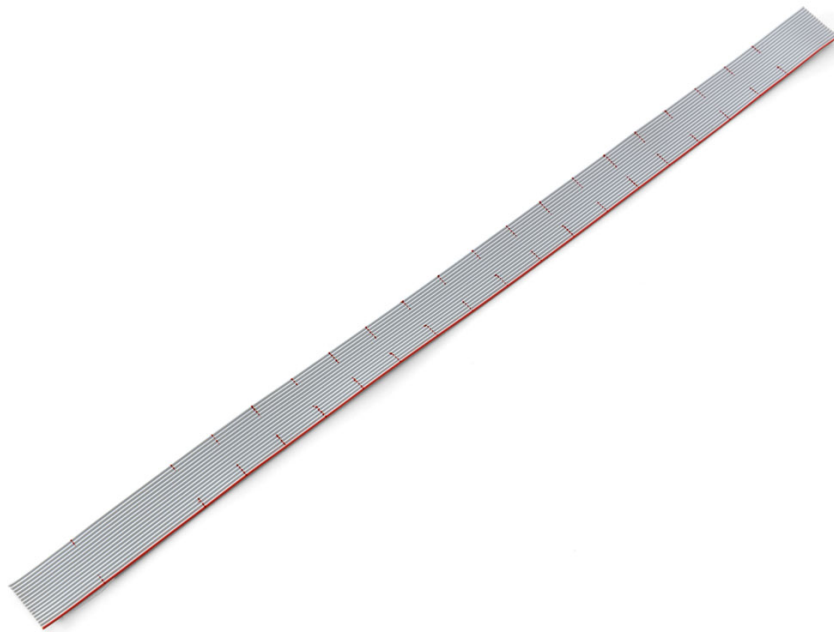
Ribbon cable marked with red lines for the placement of the wire-to-board connectors.
